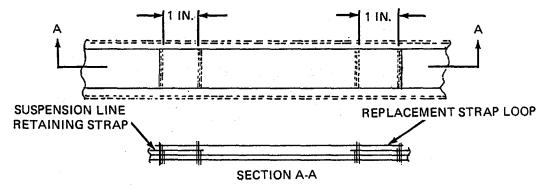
Suspension Line Retaining Strap Loop Replacement Details.
